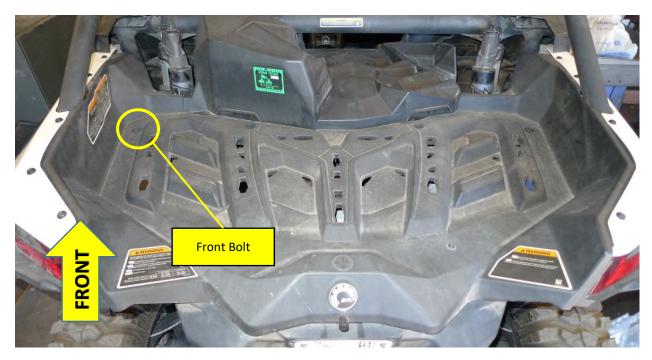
Air Compressor Bracket Mounting Locations (top view)
